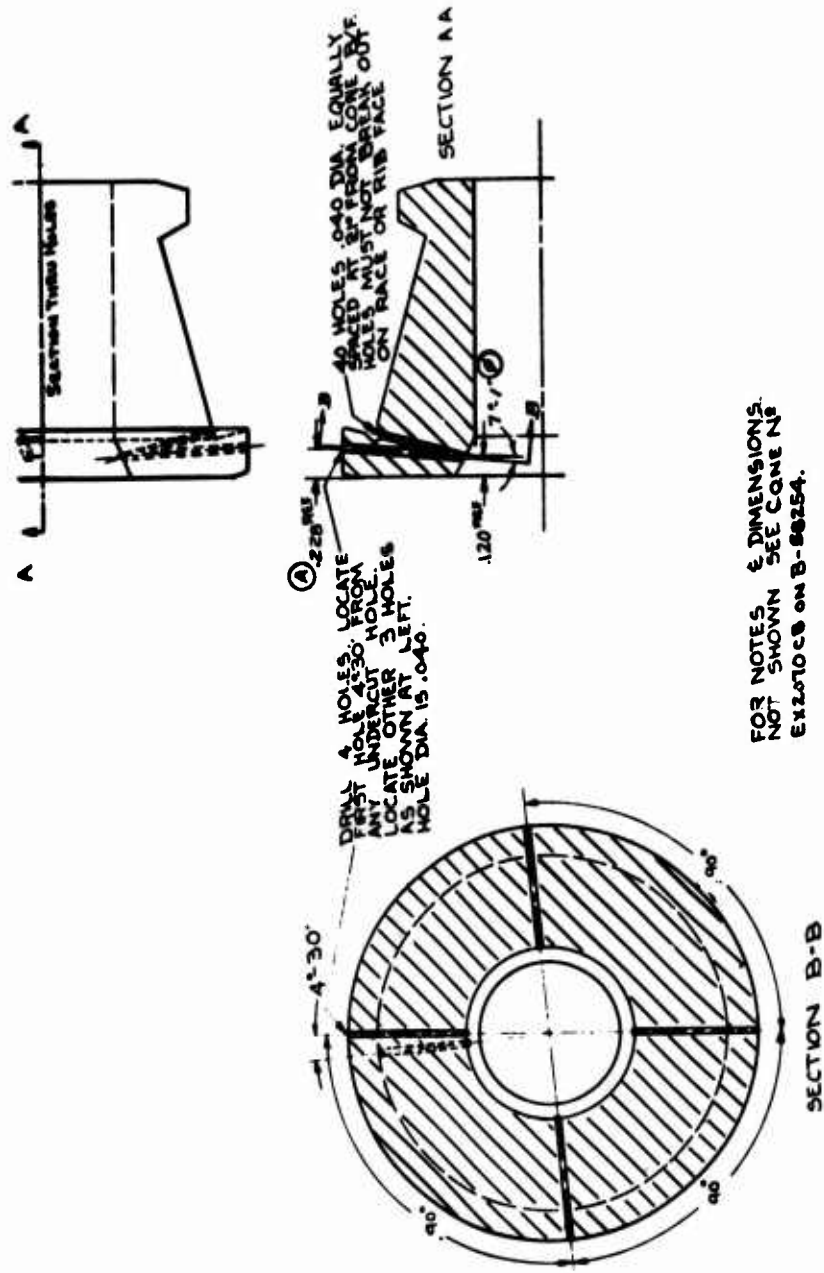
HM926700-Series Bearing - 40 Oil Holes.
